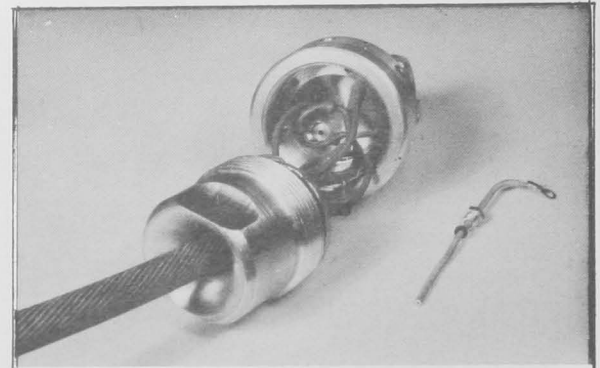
Operation 12. Insert necessary conductors into feed-through holes in the sensing-unit housing. Place the thermistor unit inside the base in a manner that will allow the babbitted section to move forward without pinching or cutting the conductors. Grease the babbitt plug and the threads of the socket. Tighten the socket firmly. DO NOT TURN THE BASE--as this will twist the conductors.
